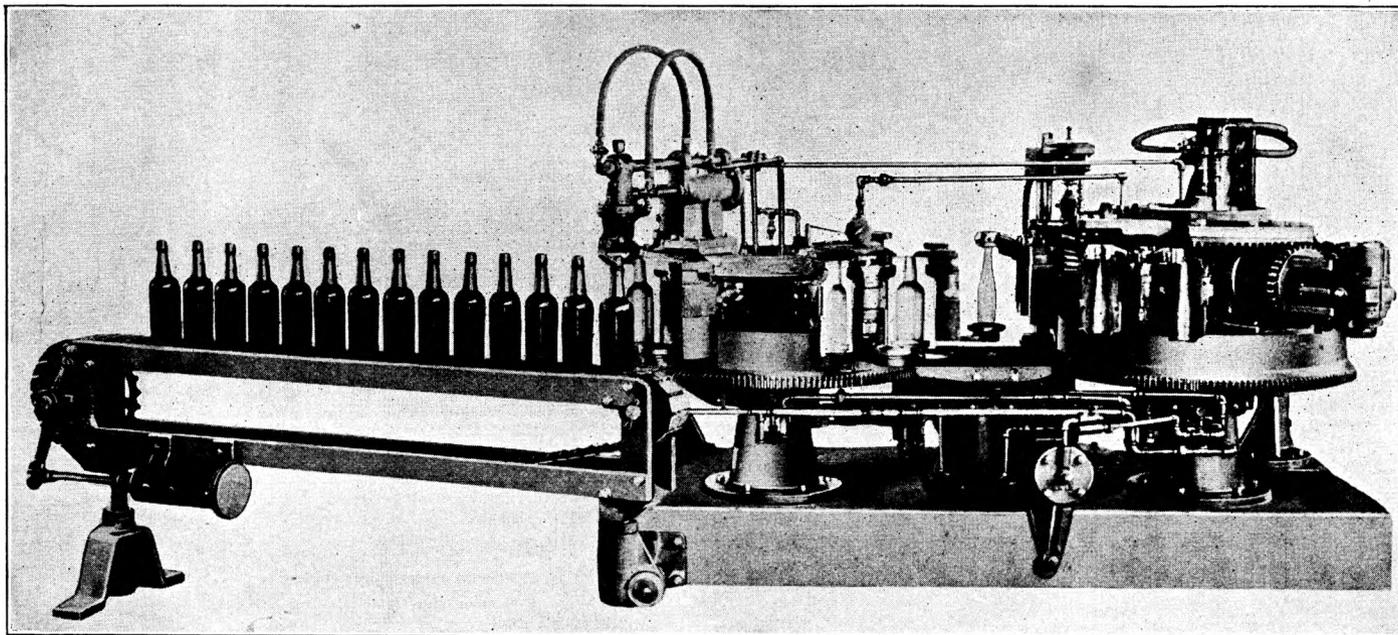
LYNCH NO-BOY AUTOMATIC MACHINE
